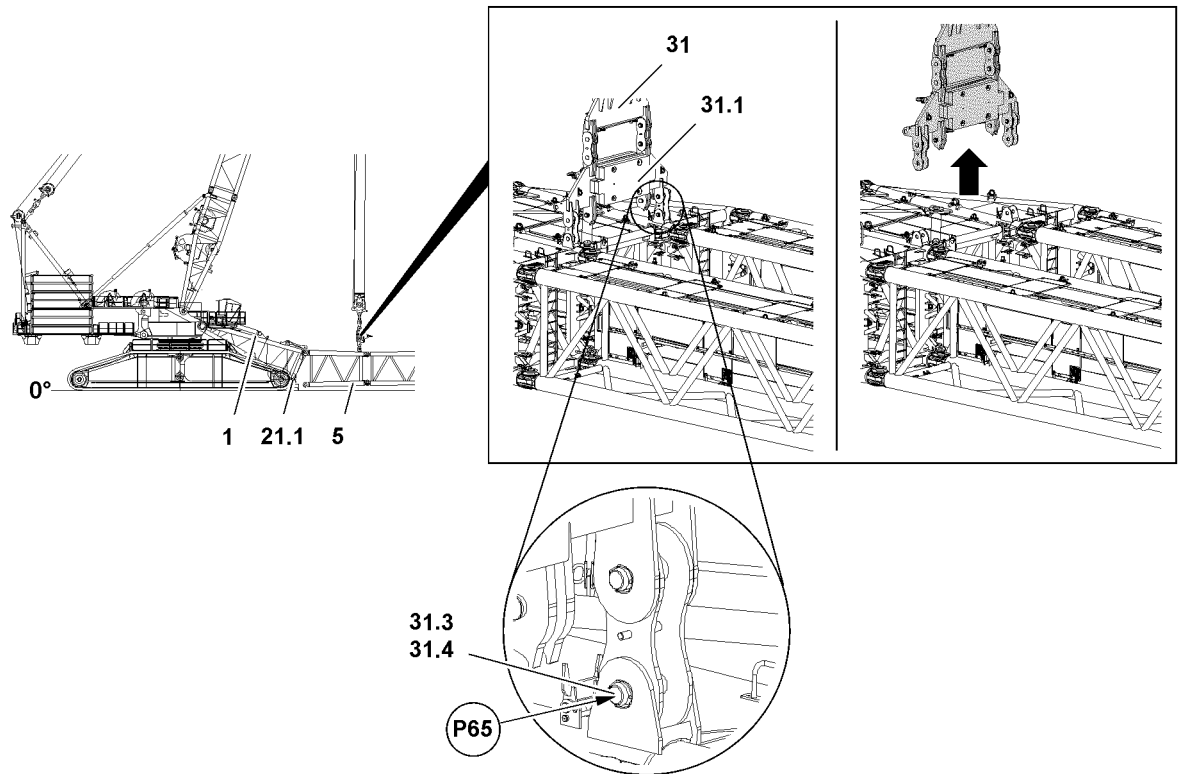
Opening the boom system - Disassembling the assembly weight on the lower P-adapter
